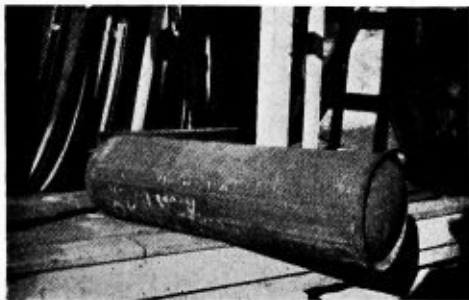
Tank No. 4. Oxy-Acetylene Welded Tank After Test, with Head Bulged Out
